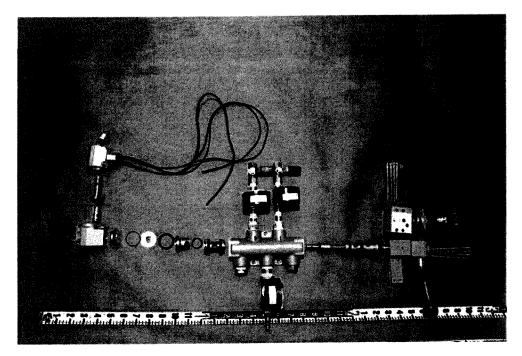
Disassembled Exemplar Versa Bottom Dump Valve
